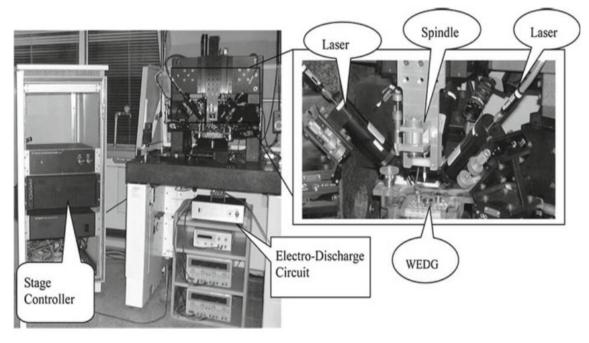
Sequential setup of μ -EDM and Laser machining [10]
